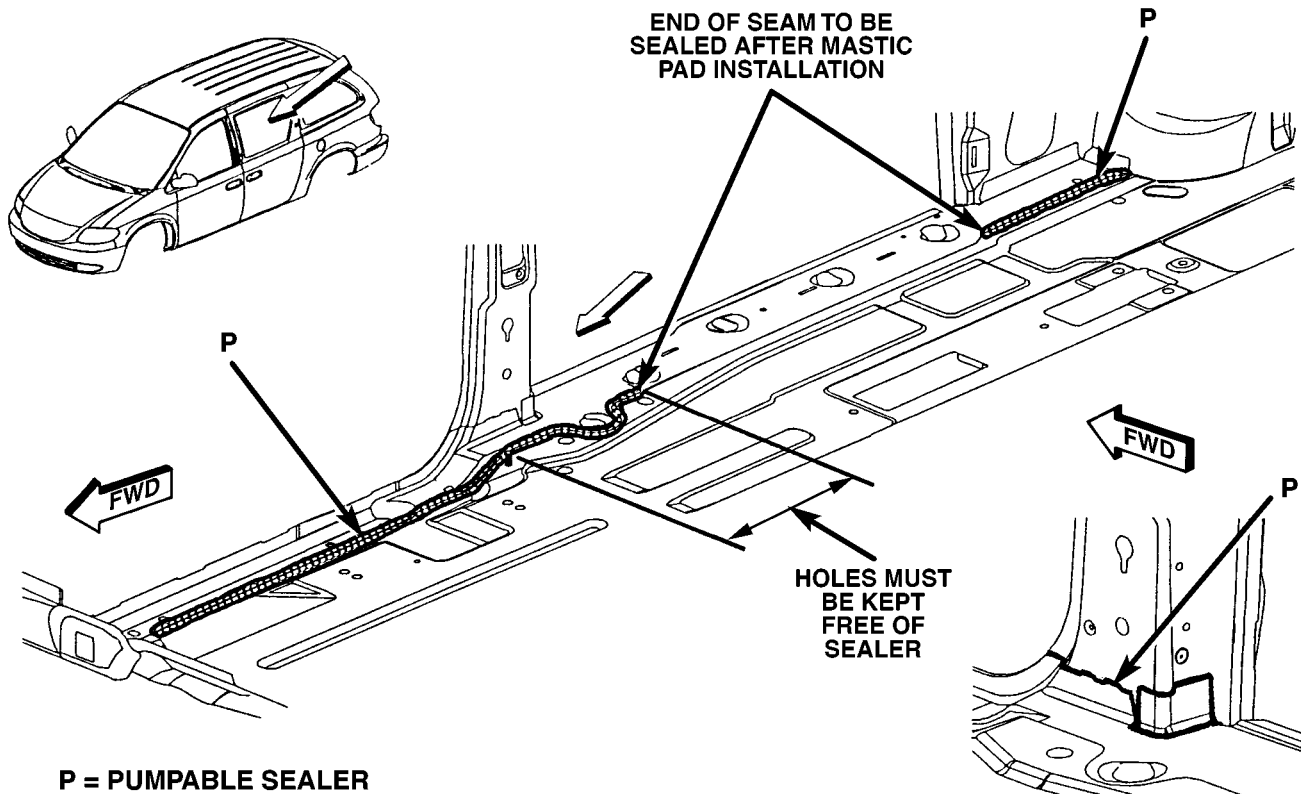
FLOOR PAN SEAMS - LEFT AND RIGHT SIDES
